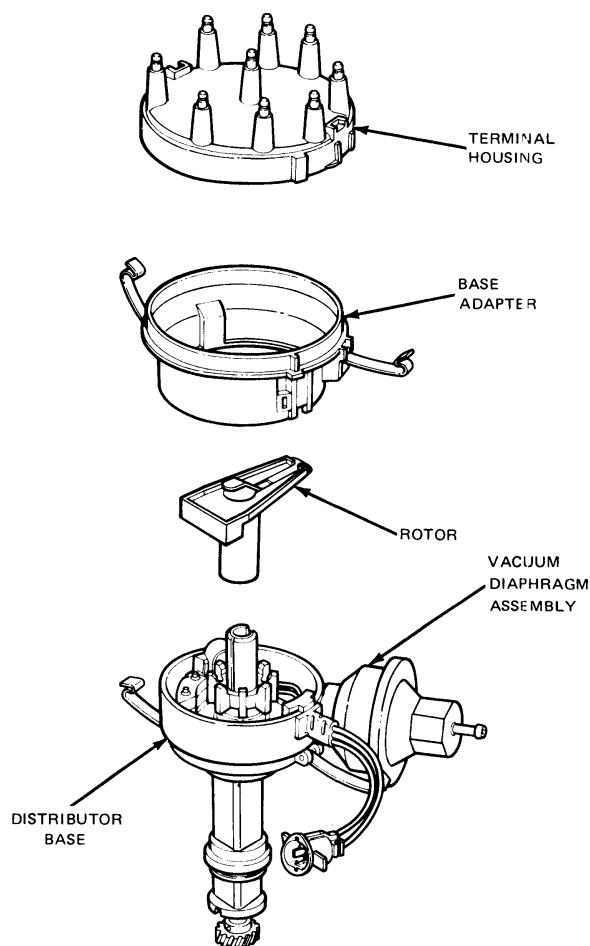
Typical Breakerless Distributor—With Dura Spark II Rotor, Base Adapter and Cap
